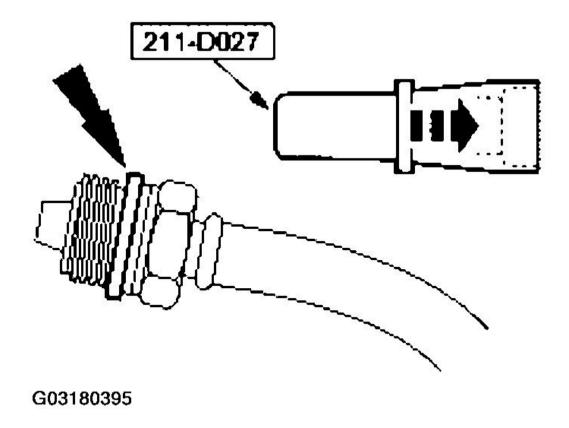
Installing New Teflon® Seal On Pressure Line Fitting Courtesy of FORD MOTOR CO.
